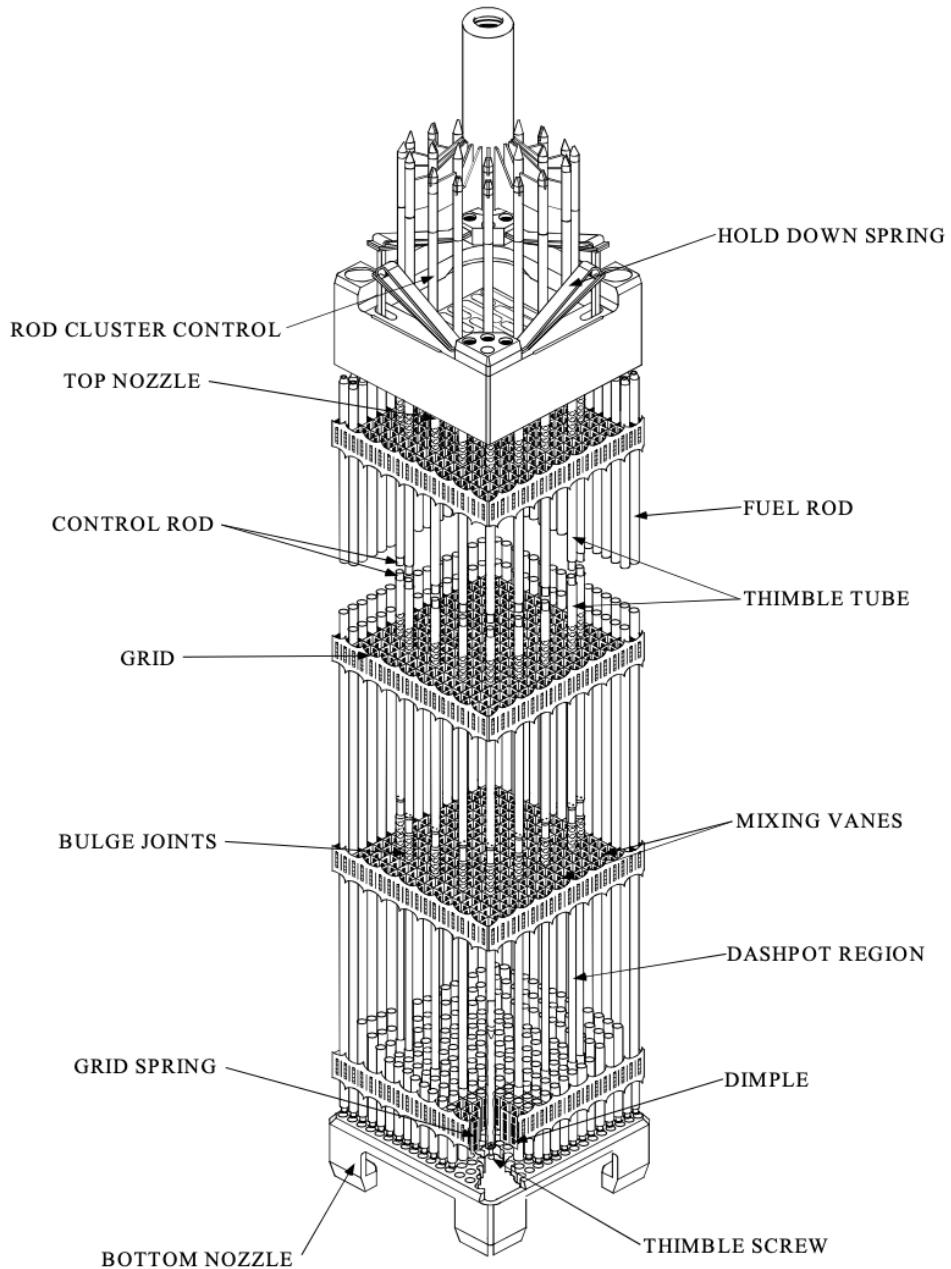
Major components of a PWR fuel assembly [68, p. 11]
